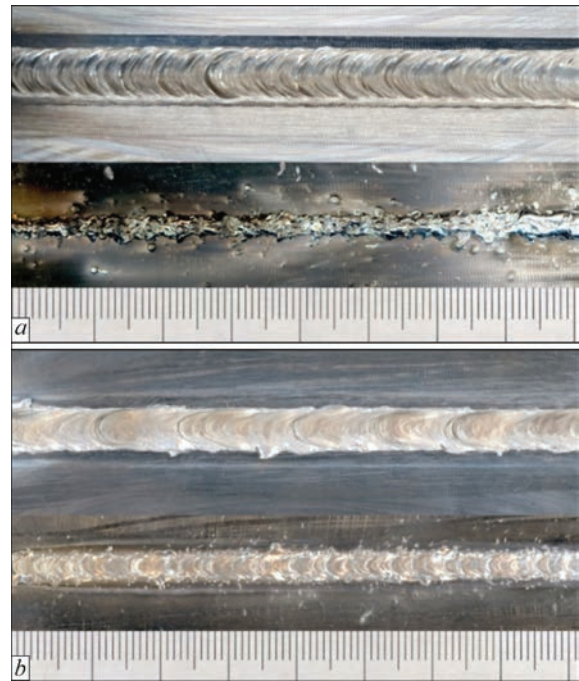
Facial side and root of the weld of specimens from stampings of 1570 alloy with a thickness of 30 mm, welded at the speeds of 2.8 (a) and 16.8 mm/s (b)
